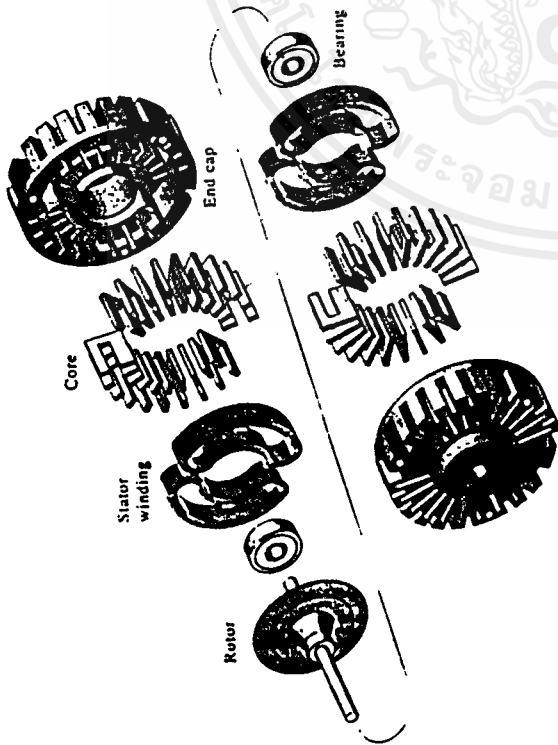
Exploded diagram of a disk-magnet motor.
